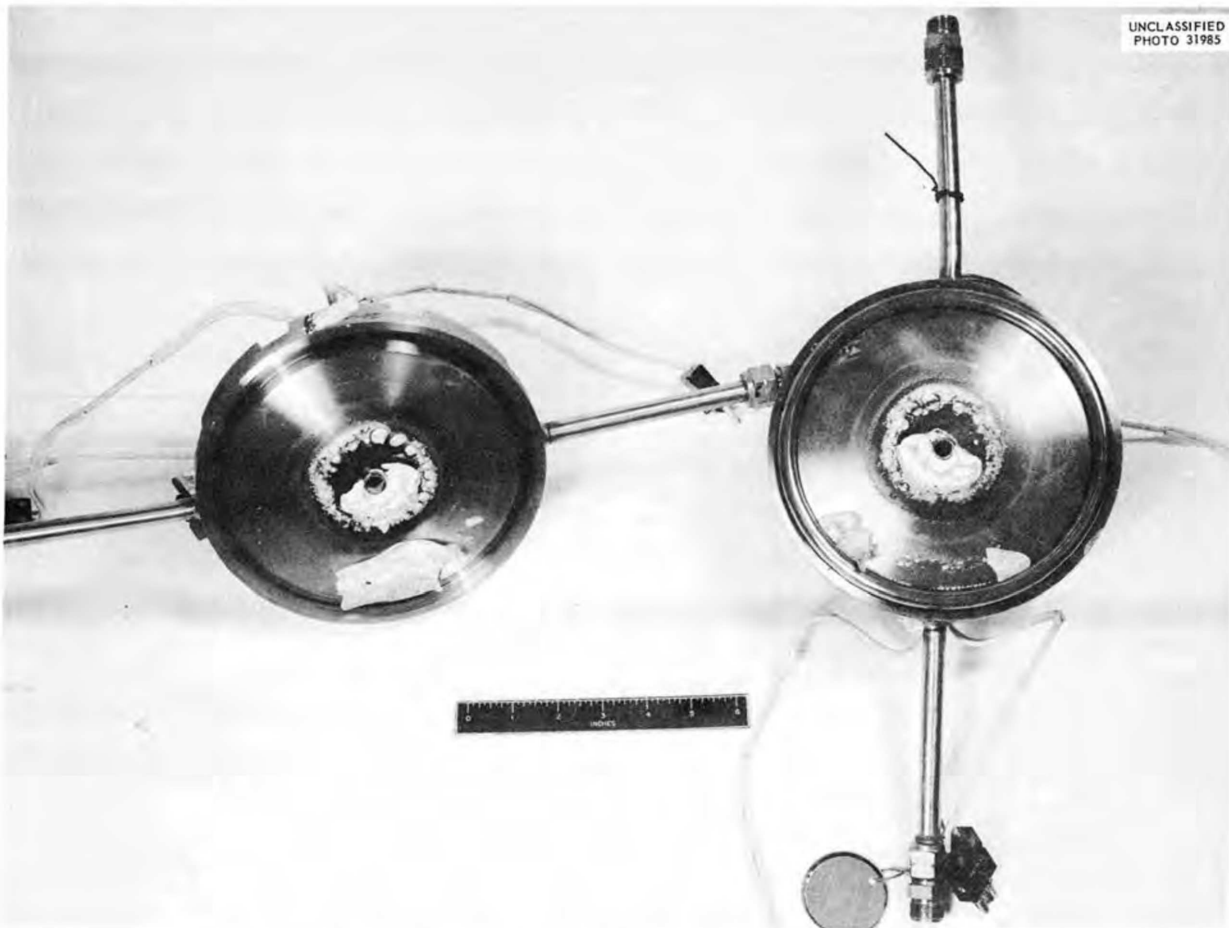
Freeze-Flange Joint After Removal from Molten Sodium Test Loop.
